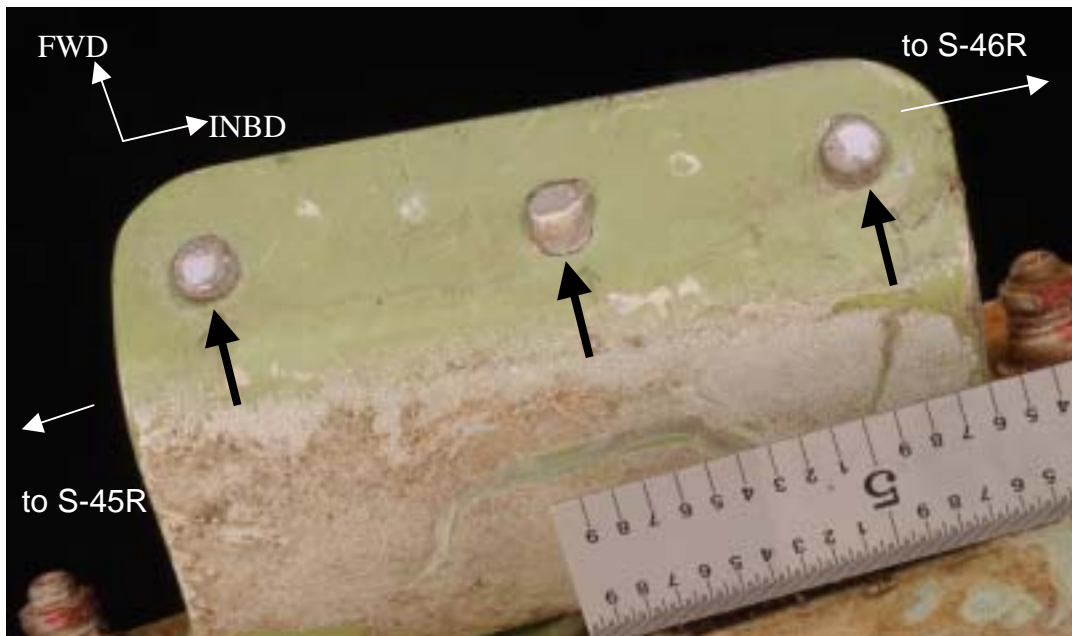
Skin flange rivet fractures at shear tie between S-45R and S-46R of the STA 2040 frame. Black arrows indicate the direction of loading.
